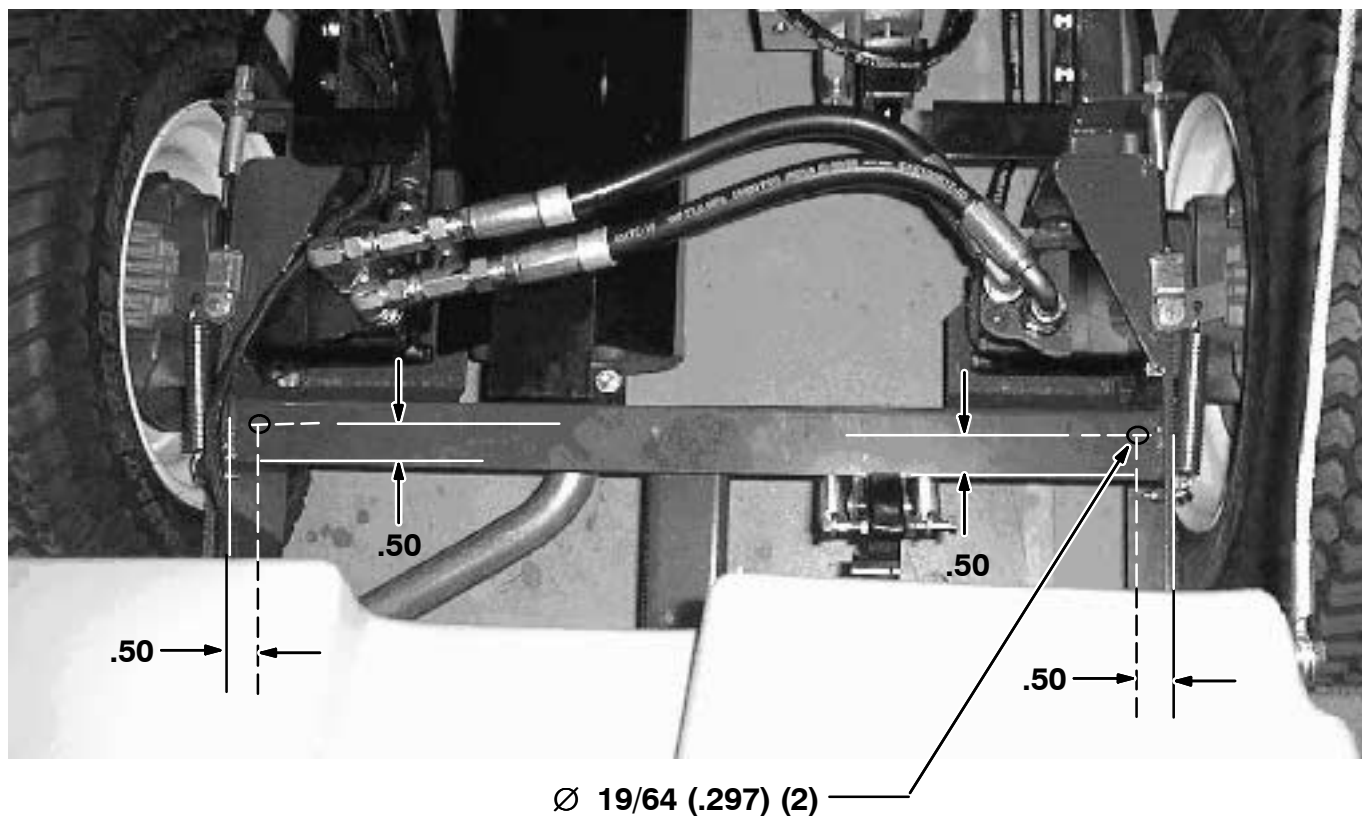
HOLE LOCATIONS FOR SPRING EYELET MOUNTINGS
